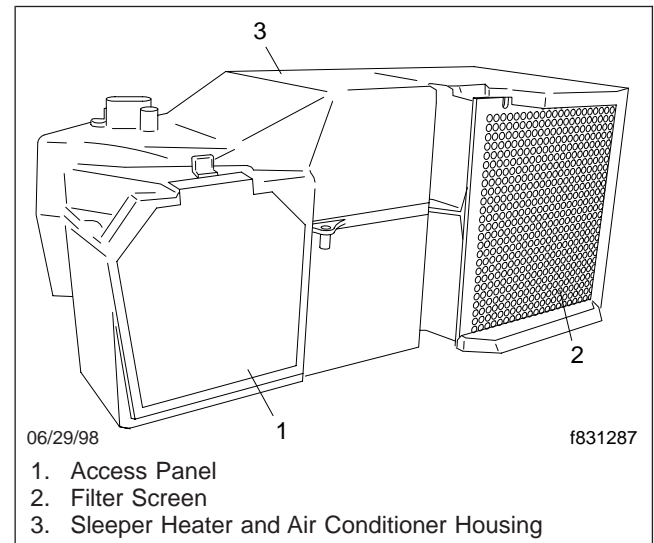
, Sleeper Heater and Air Conditioner Housing With Recirculation Filter
